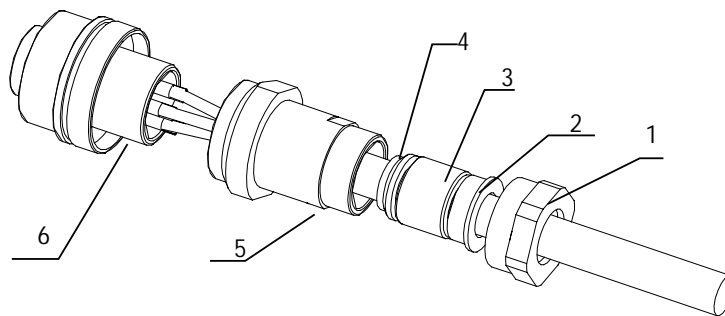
Assembling a Power Cable Connector (step 4)
